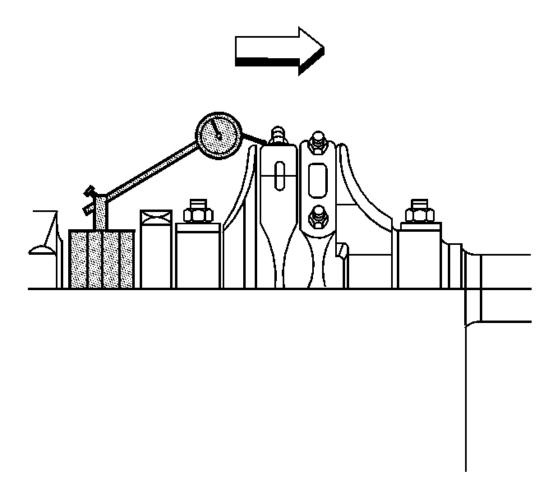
Measuring Connecting Rod Side Clearance Using J 7872 Courtesy of GENERAL MOTORS CORP.
